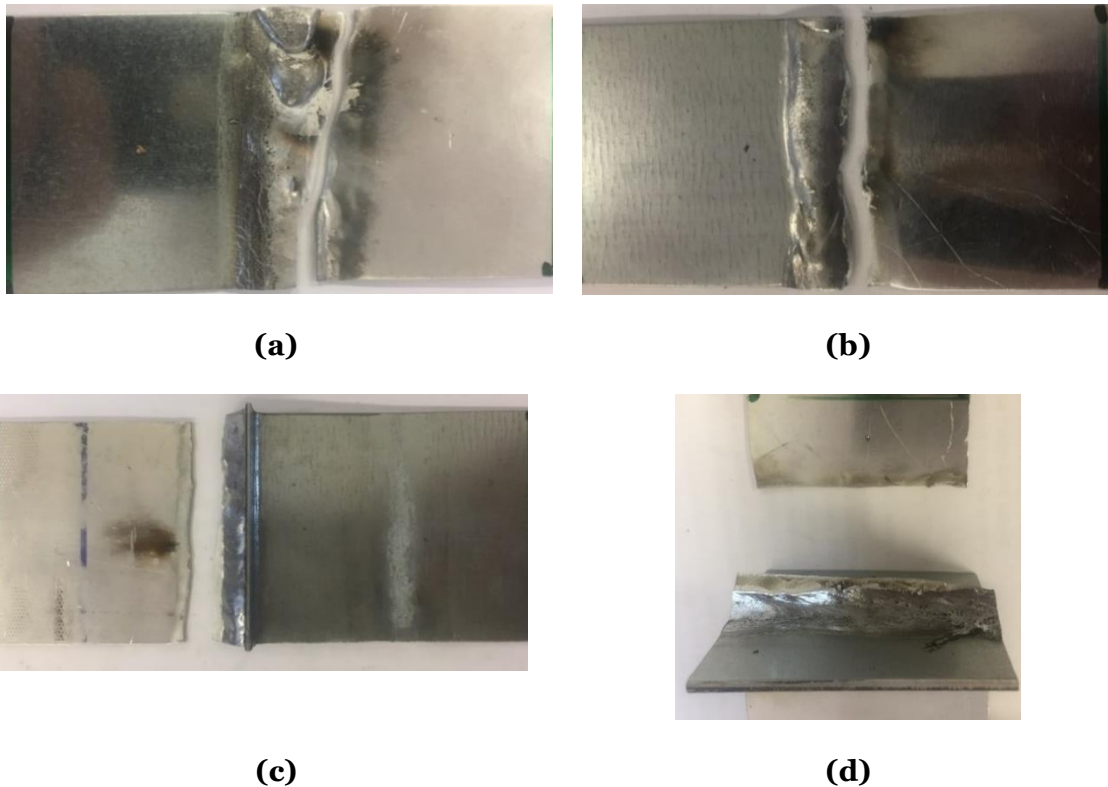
Fatigue Failure of butt, lap and cruciform welded joints.
